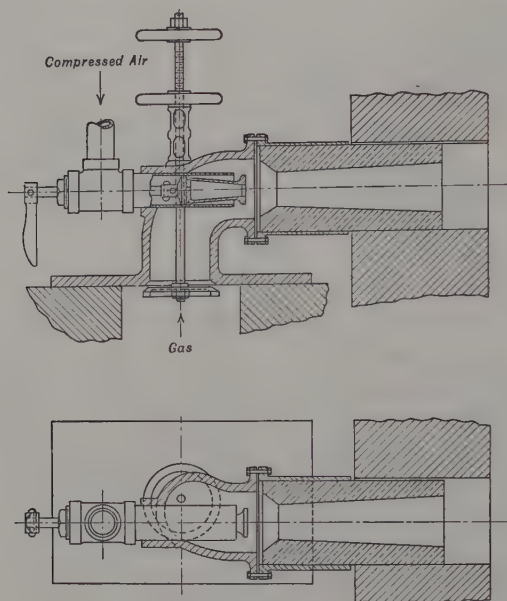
Burner for raw producer gas. Note the two hand wheels for freeing gas valve when stuck with tar.
